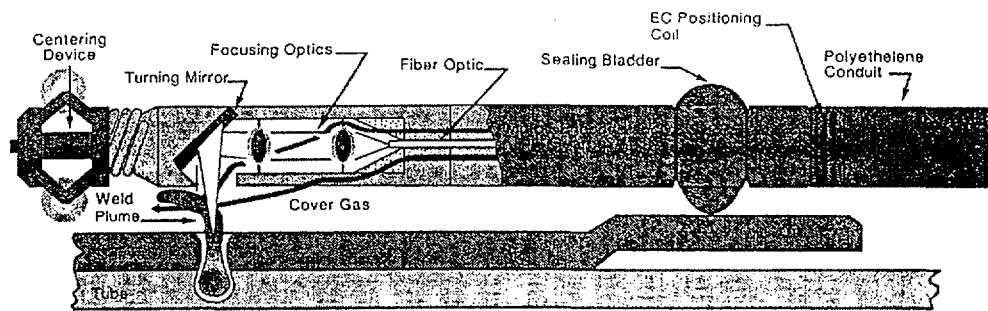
Laser weld head for repair of steam generator tube.
